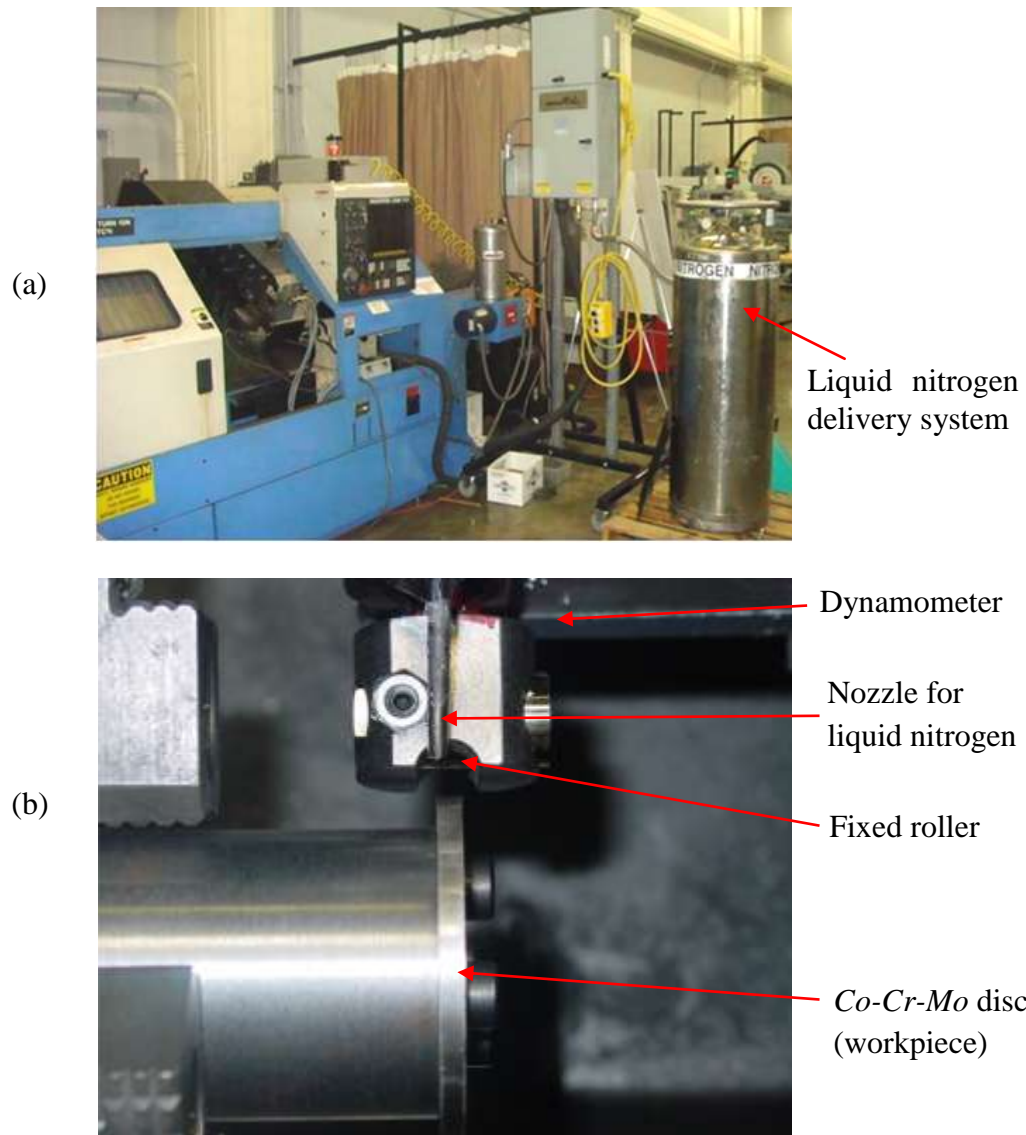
Experimental setup for cryogenic burnishing of *Co-Cr-Mo* discs: (a) Mazak CNC machine equipped with ICEFLY<sup>®</sup> cryogenic equipment, (b) setup details.
